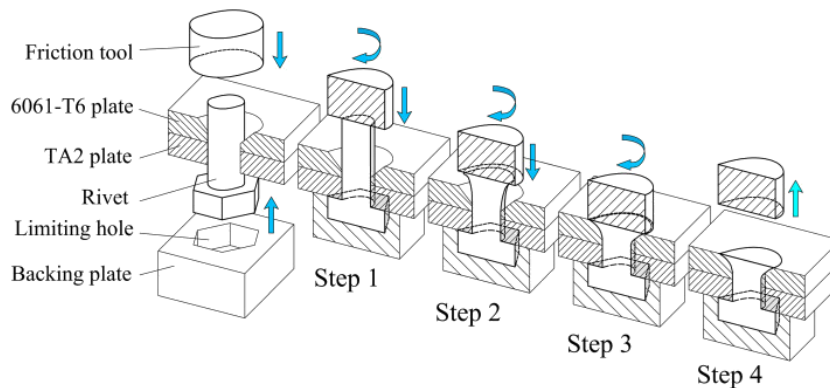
Principal steps of Friction Forge Riveting process [16]
